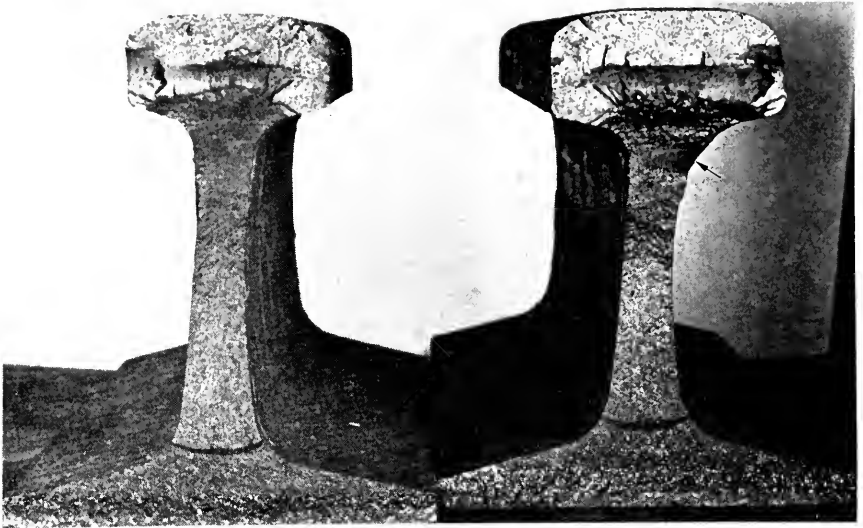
Fractured faces of an electric flash butt welded rail joint, specimen 225E, that failed after being subjected to 956,500 cycles of repeated loading in the 12-in-stroke rolling-load machine under a 57,500-lb wheel load. This failure originated in the fillet between the head and web, marked with an arrow in photograph, and is the result of a shear drag.
